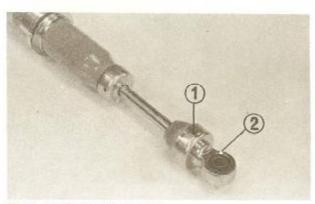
(1) Upper spring seat (2) Upper shock mount eye
